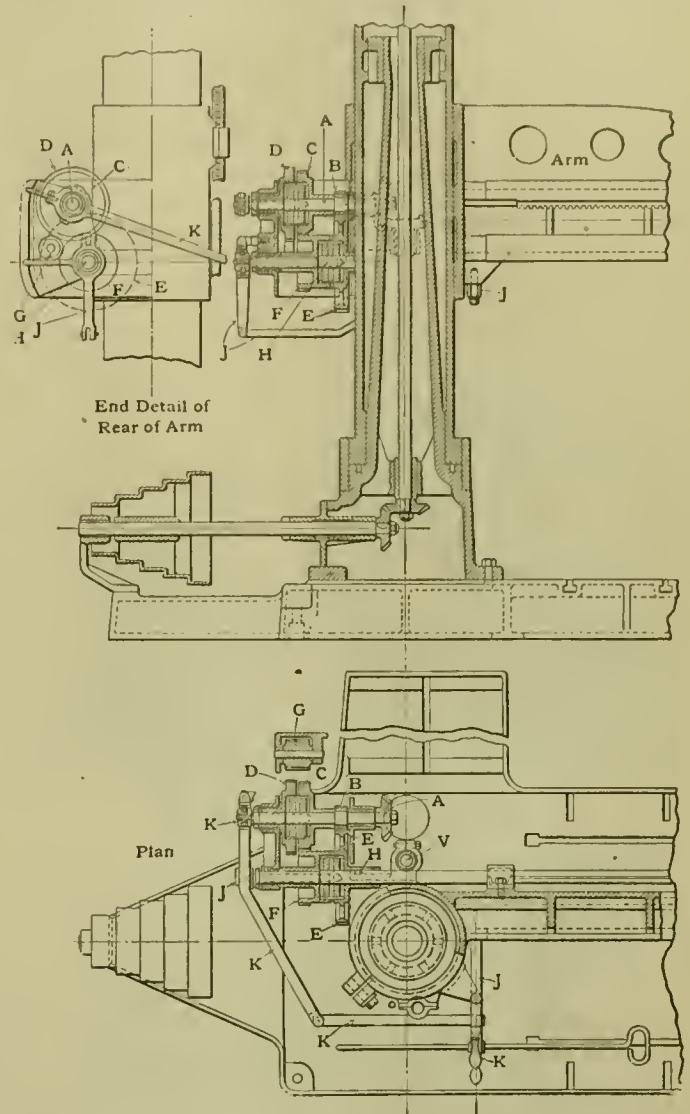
DETAILS OF THE CHANGE-GEAR MECHANISM UPON THE REAR END OF THE ARM OF THE DRILL FOR OBTAINING ADDITIONAL SPEEDS AT THE SPINDLE.
